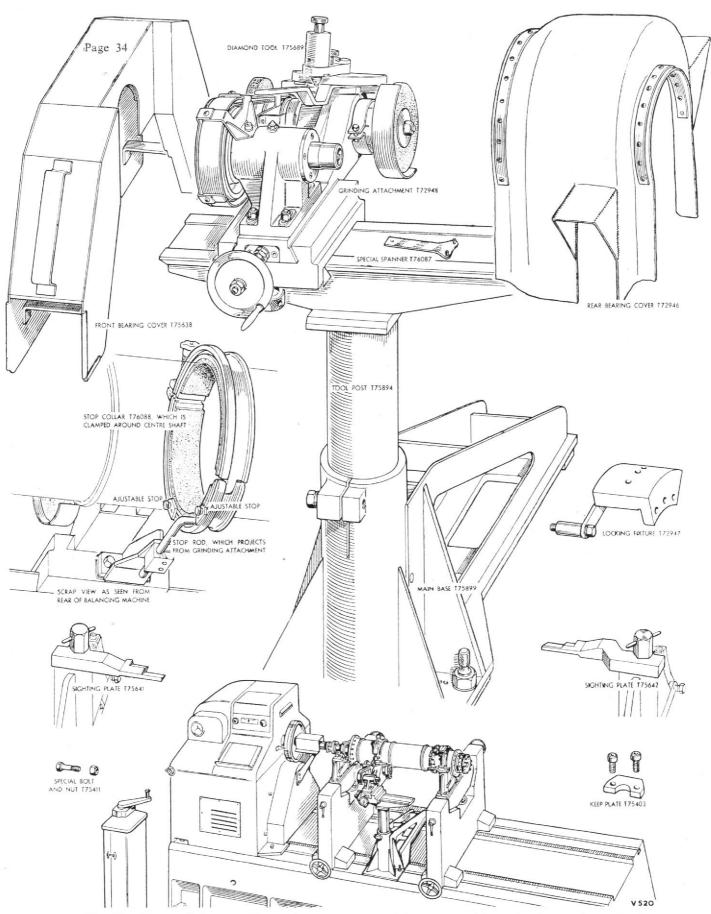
Centre shaft assembly in Avery type 7208 balancing machine; showing tools used when correcting unbalanced forces.
